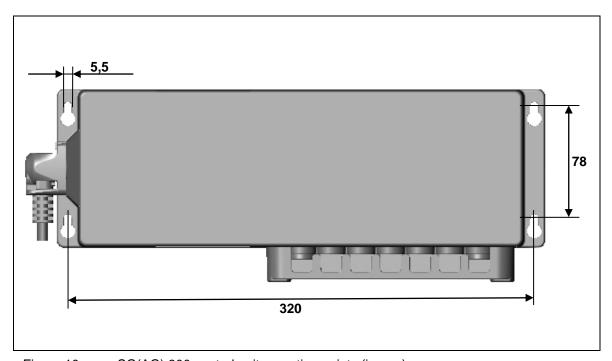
SG(AG) 300 control unit mounting points (in mm)
